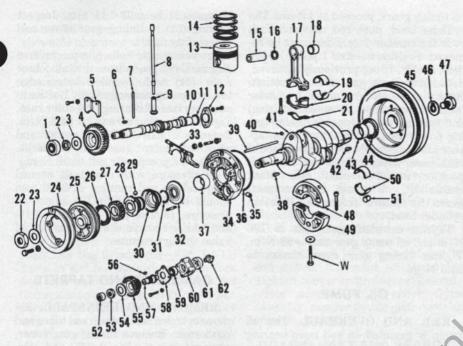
Exploded view of crankshaft, camshaft and oil pump assemblies.
